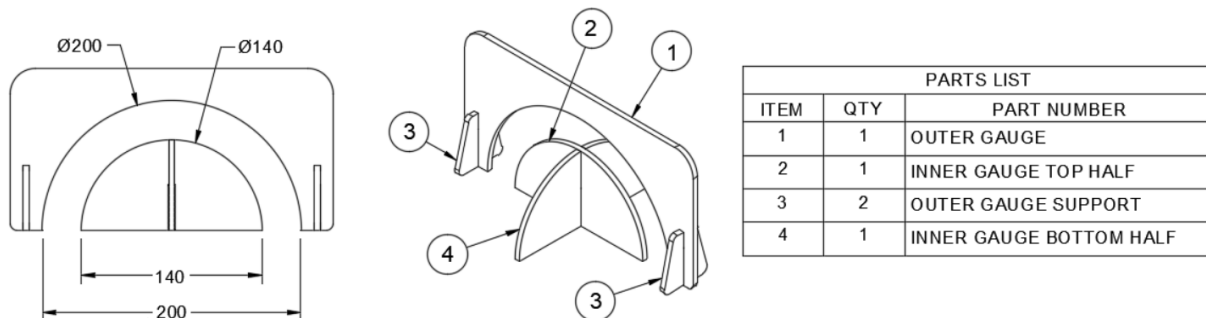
(Left) A front view of the dome inner and outer gauges fully assembled and together, with critical dimensions noted. (Center) Isometric view of the inner and outer dome gauges fully assembled and together. (Right) Parts list describing each gauge component, corresponding to the center isometric view. Units are in [mm].
